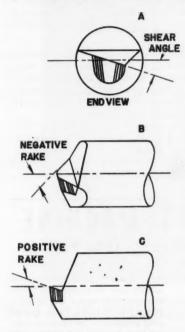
(A) Correct Shear Angle will Decrease Cutting Pressure; Should be 7 Deg. for Bronze and about 12 Deg. for Aluminum. (B) When Possible to Use It, a Negative Rake Adds Life to the Cutting Edge. (C) The Positive Rake or Hook Should be Avoided Whenever Possible
